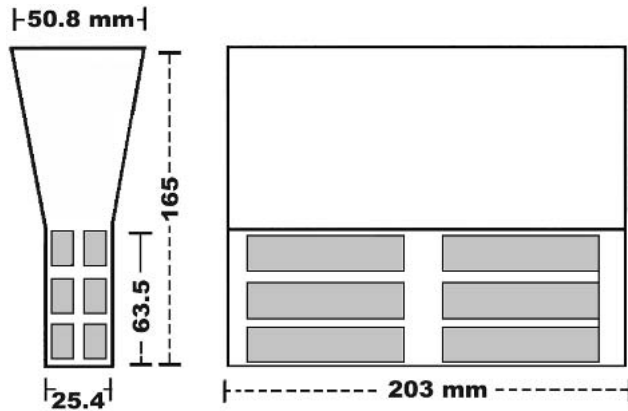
Dimensions of Y block casting and location of mechanical testing samples
